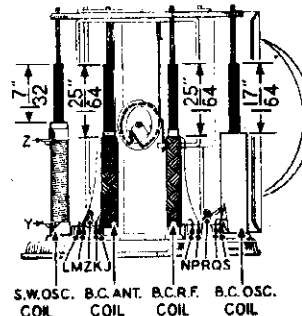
SLUG TUNER ASSEMBLY (rear view)
